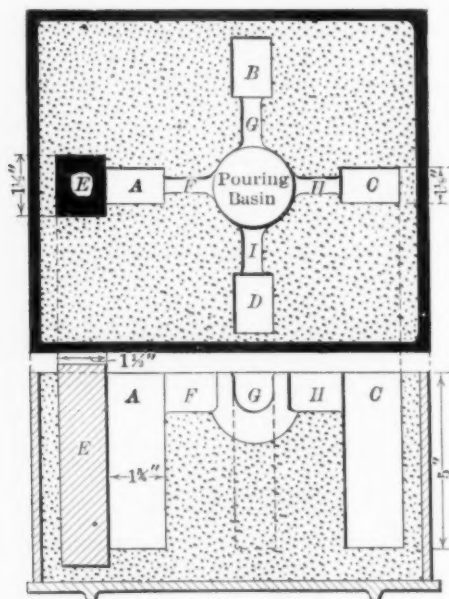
MOLD FOR TEST BARS THAT SOLVED INSIDE CHILL PROBLEM
